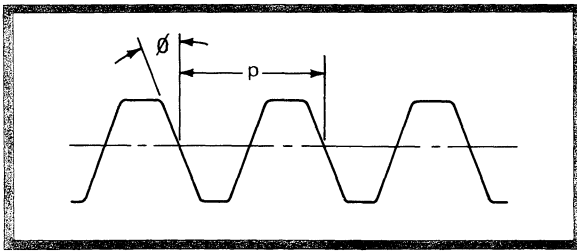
An involute tooth form gear of infinite pitch diameter is called a Rack. The teeth have straight sides whose angle equals the chosen pressure angle.
